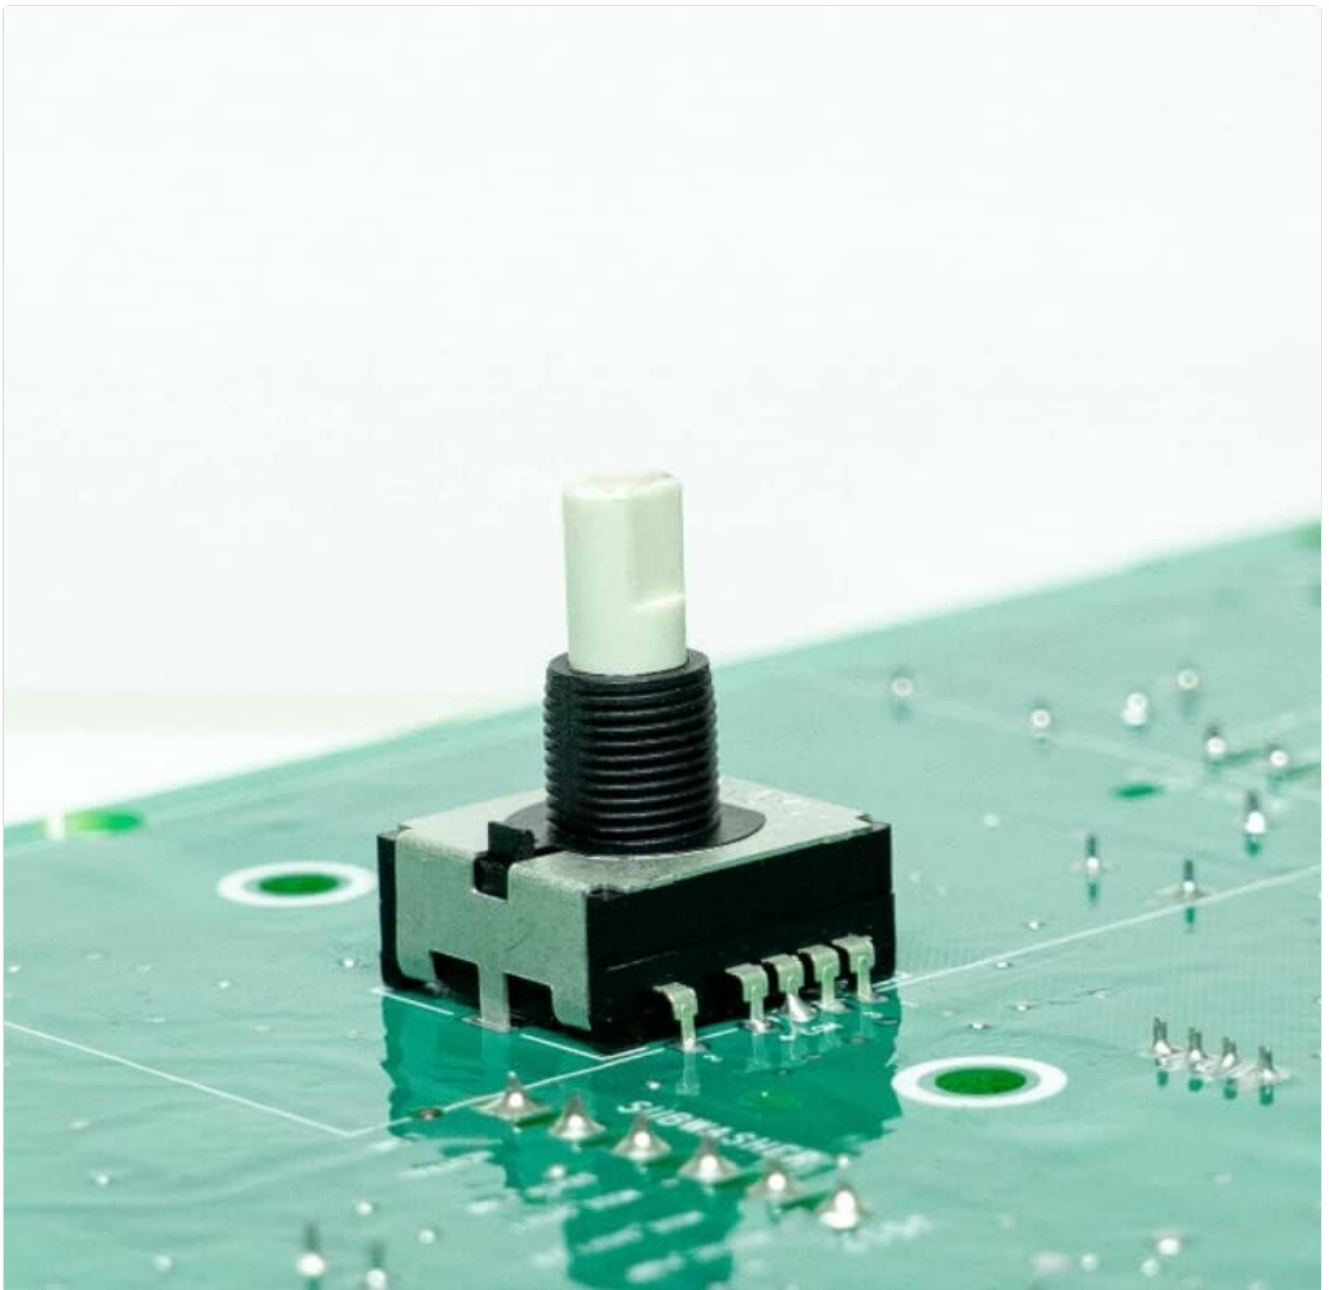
Close-up of the rotary knob shaft. Ensure the corresponding knob on the control panel aligns and attaches correctly.
